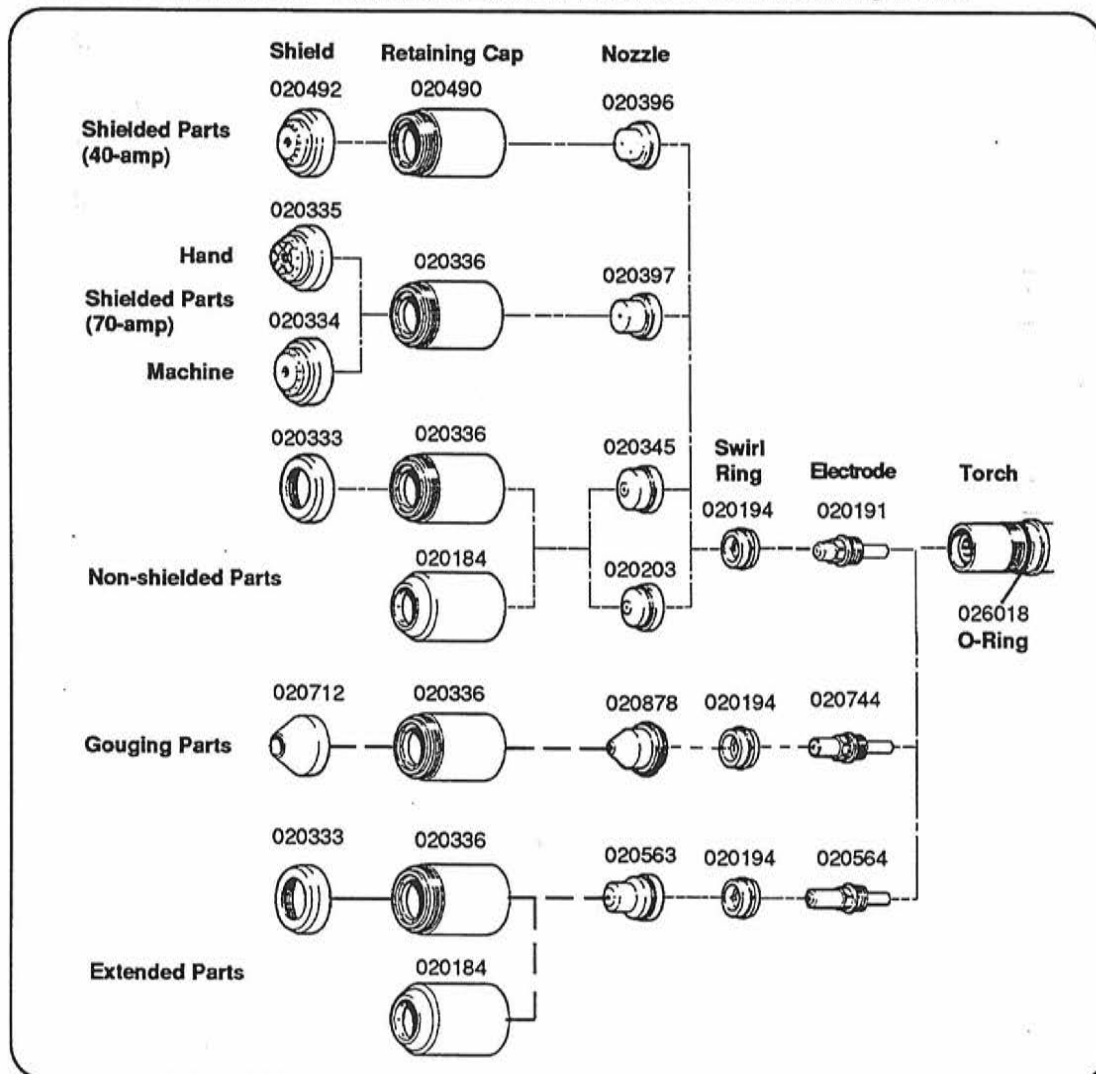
PAC130 Hand and MAX70 Machine Torch Consumable Parts
